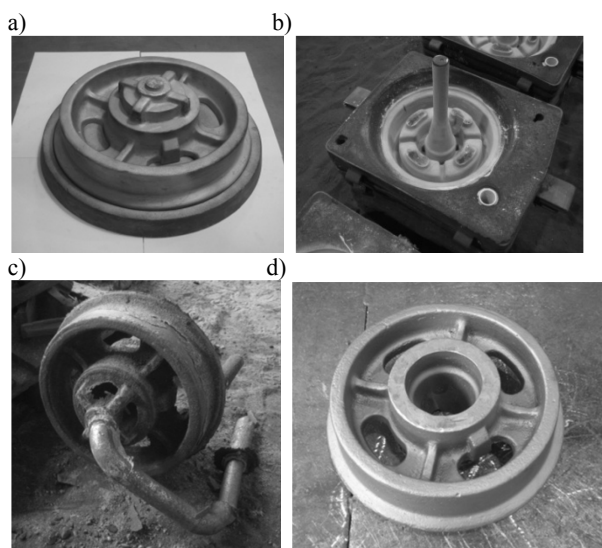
a) Casting model b) Lower semi-mould after depositing of the protection coating c) Steel casting after being knocked out from the mould d) Test casting after cleaning in the shot blasting machine
